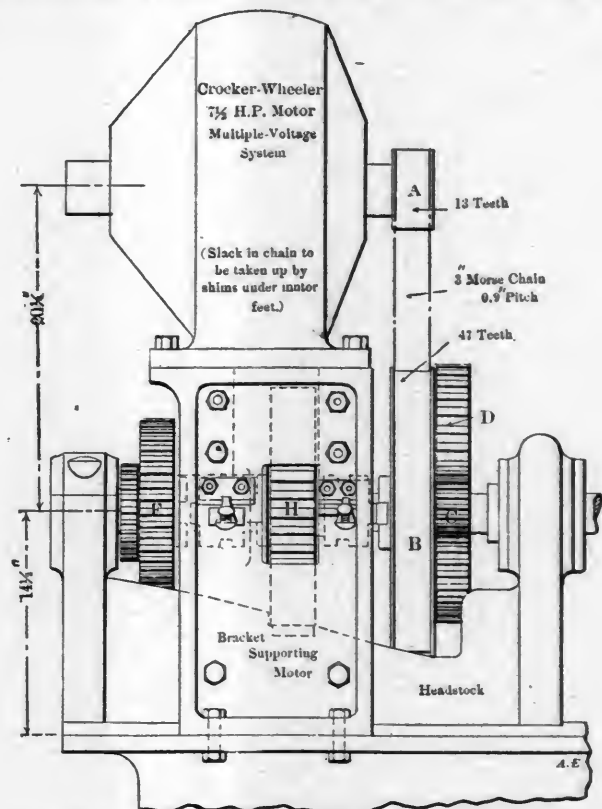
METHOD OF MOUNTING THE MOTOR UPON THE 25-IN. PUTNAM LATHE.
